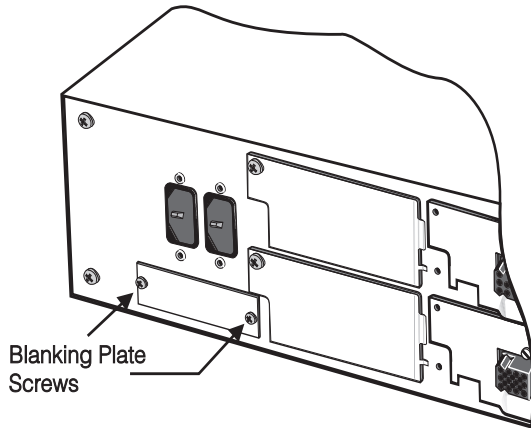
Removing the Blanking Plate on Advanced RPS
